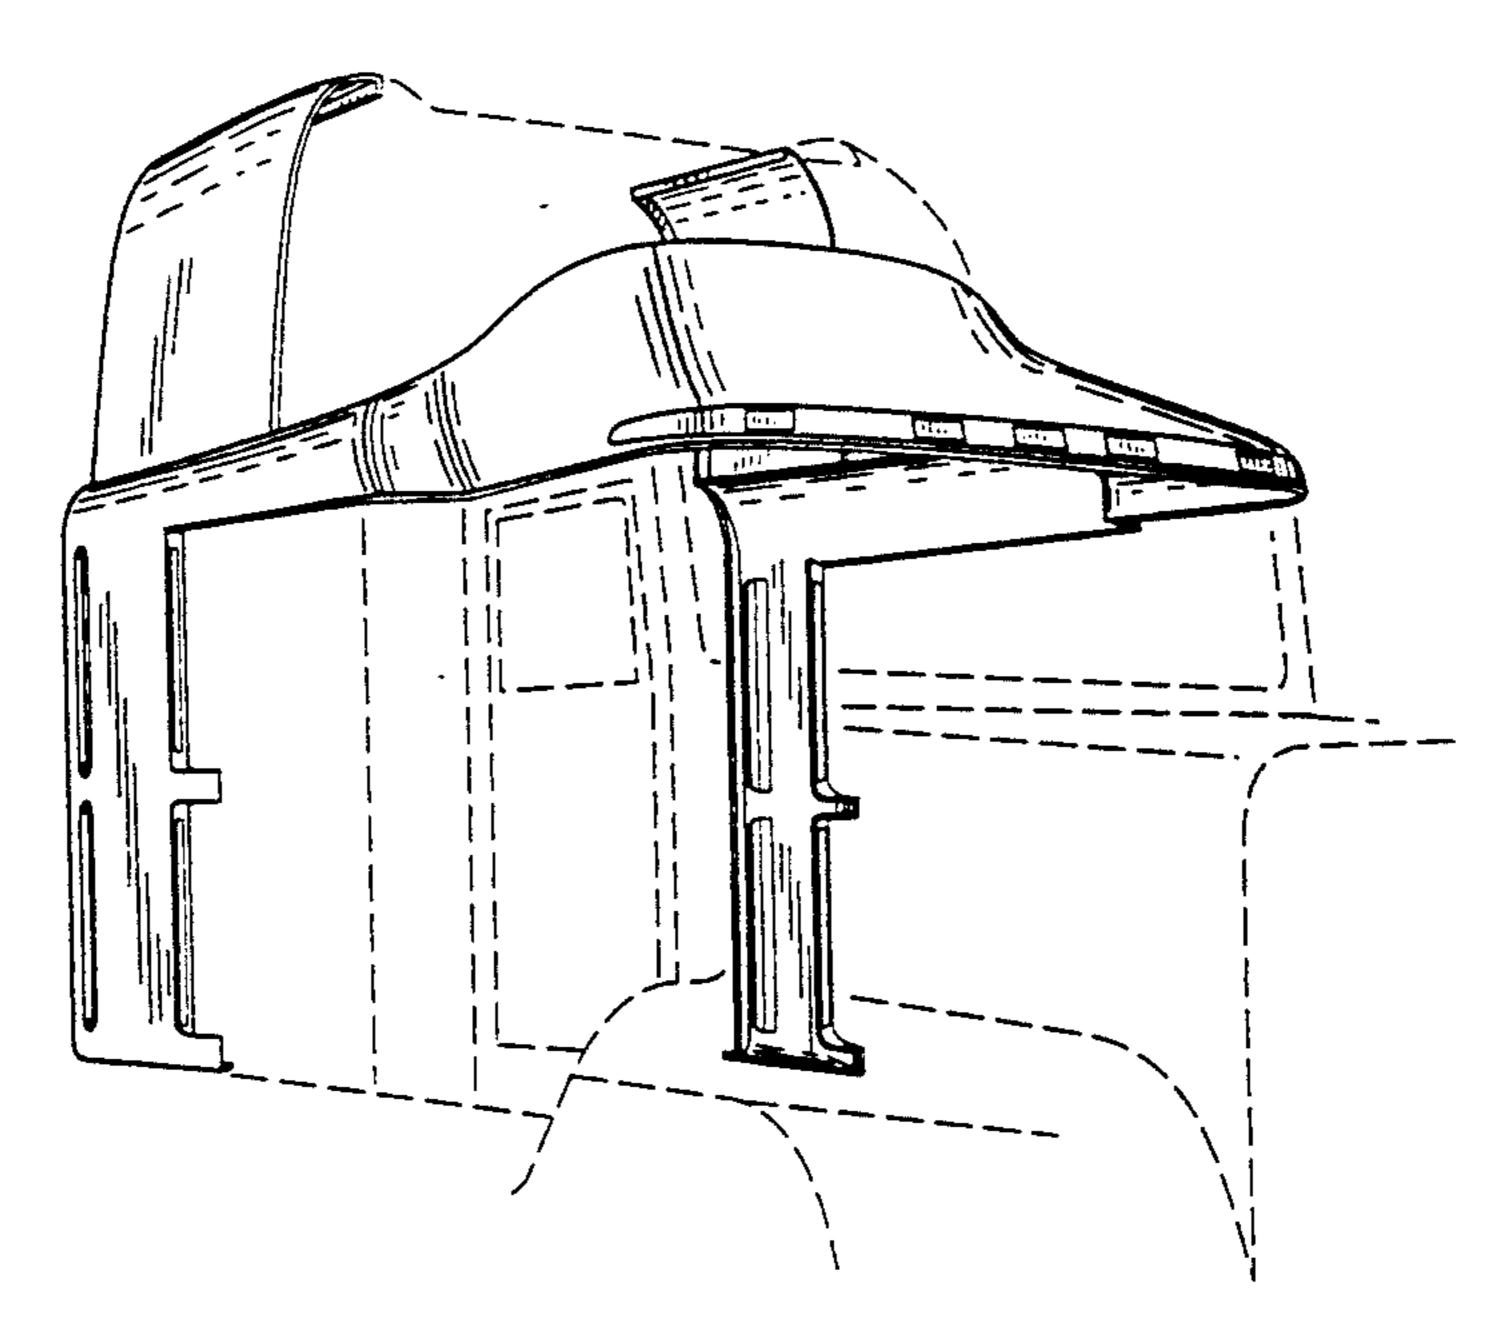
is a front view of the embodiment shown in FIG. 7;
